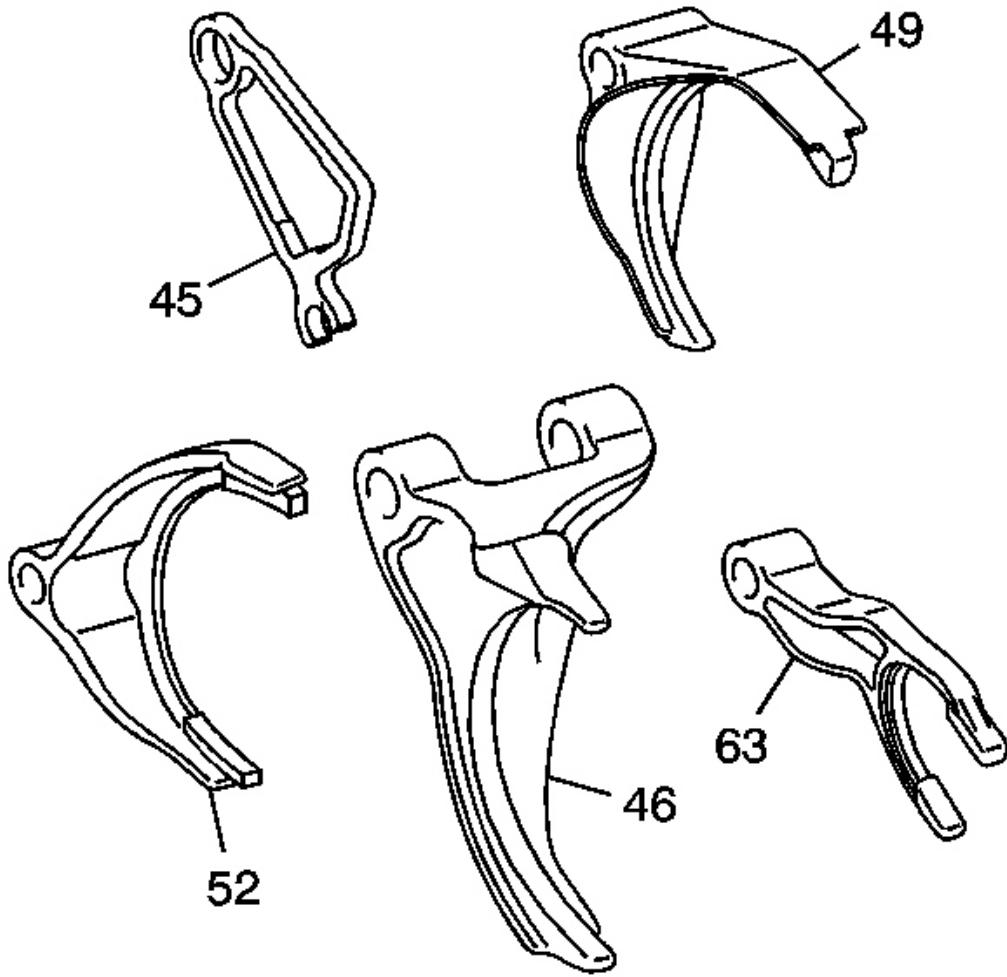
Inspecting Cam, Shift Forks & Assembly
